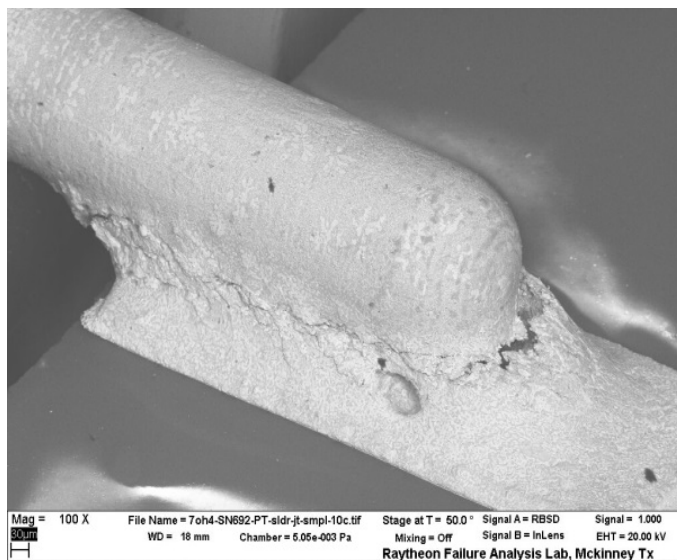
Solder Joint from Pin to Surface-Mount Circuit Board Pad Exhibited a Crack (100X).
